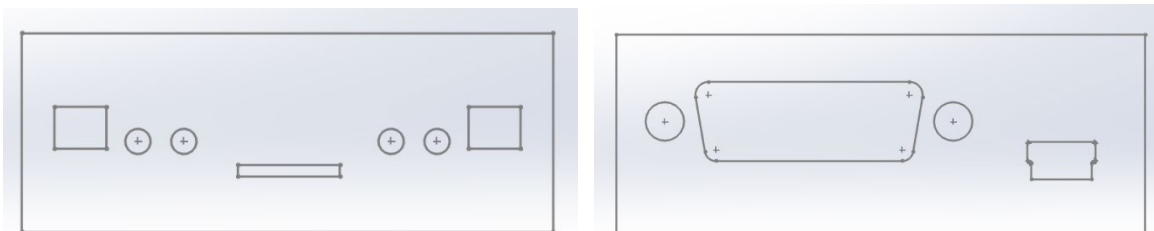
SolidWorks drawing of CAN Logger 3 enclosure end panels with SD card and buttons side (left) and D-SUB 15 cable and mini USB side (right)
